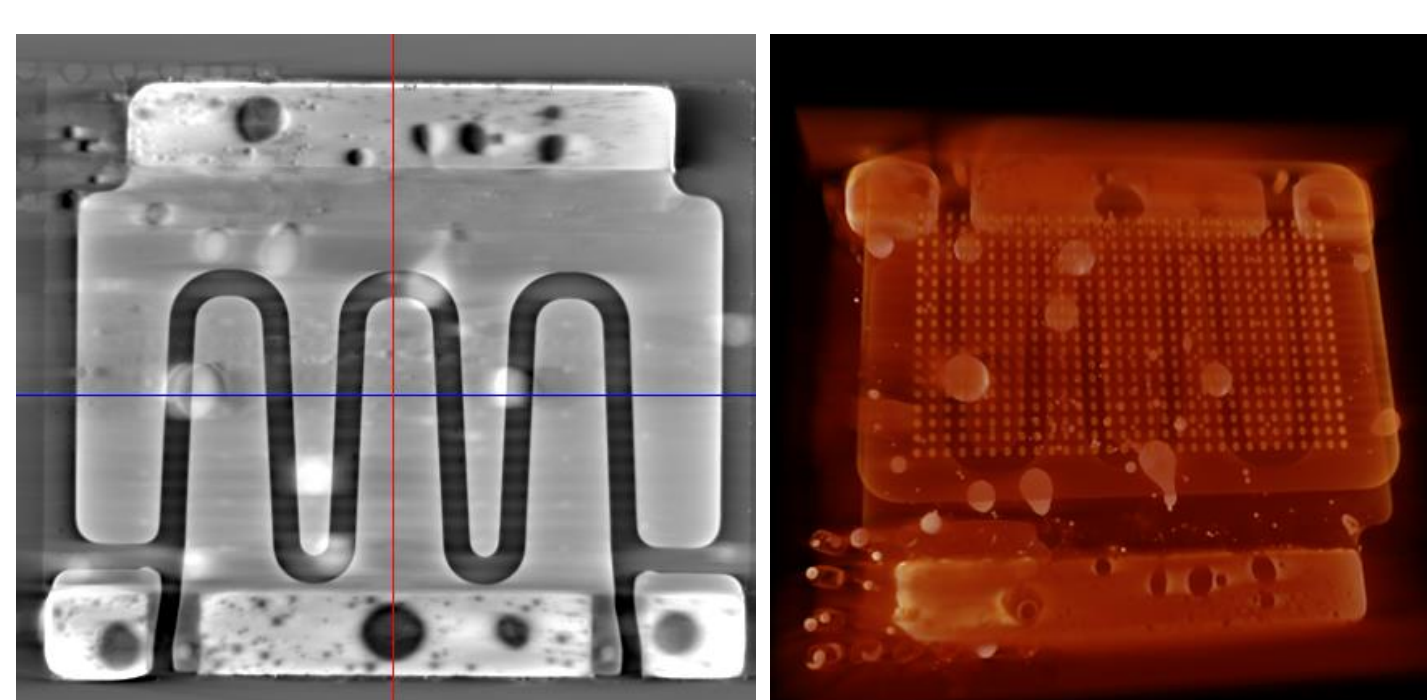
Solder Layer View and full x-ray CT scans of GS66516T package
